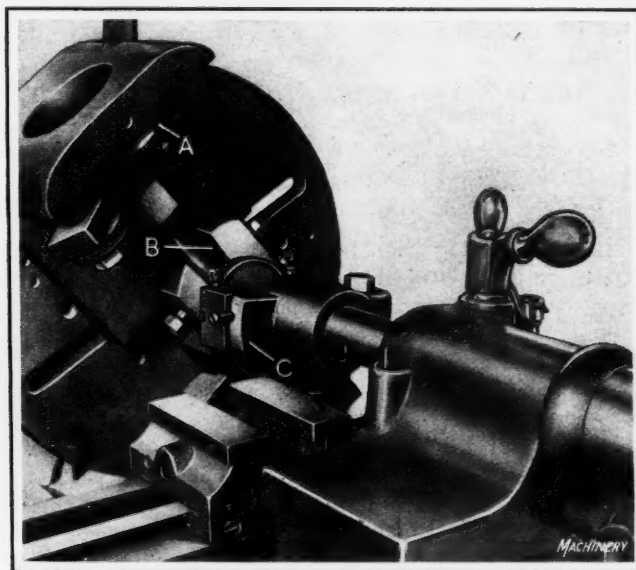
Lathe Set-up for machining the Stand to receive the Gage Head
